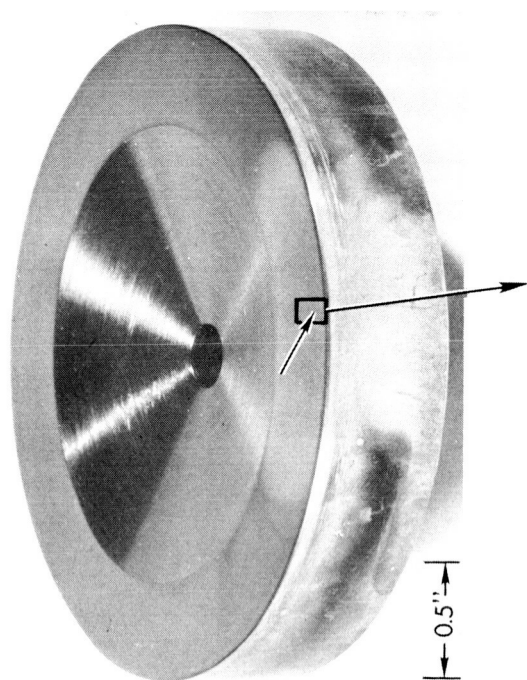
Bottom flange of pressure transducer 14 after removal of weld nugget. Enlargement of inside facing flange shows depth of crack propagation.
